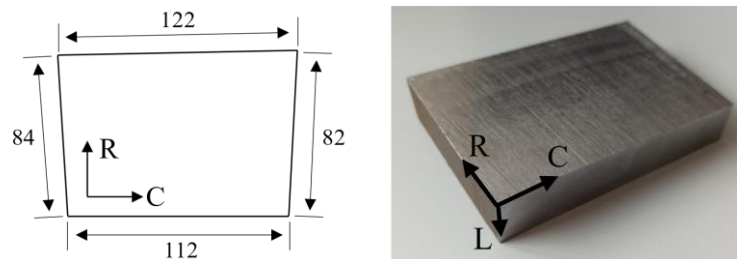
SA-508 Cl.3 block used for specimen fabrication (dimensions in mm)
